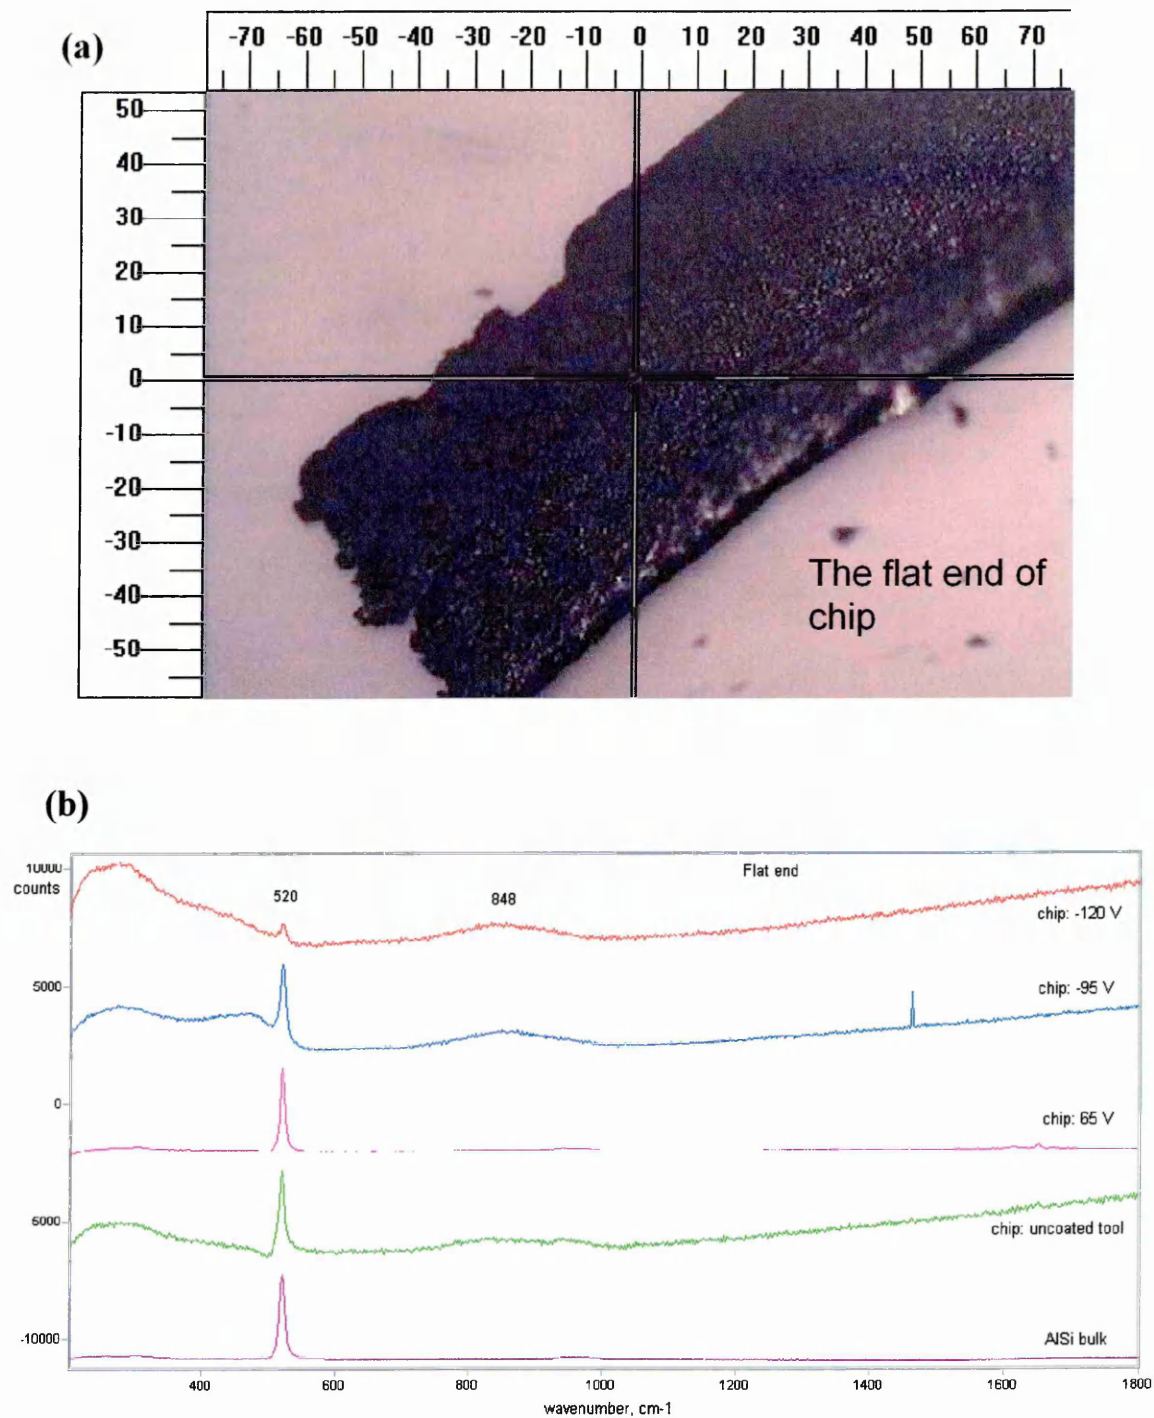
(a) Optical image of the flat end swarf/chip of removed workpiece material, (b) Raman spectra of the flat end of the chip removed after milling tests using uncoated and C/Cr coated ($U_B = -65, -95, -120$ V) end mills. The spectrum of bulk AlSi workpiece material shown in purple is taken for reference
